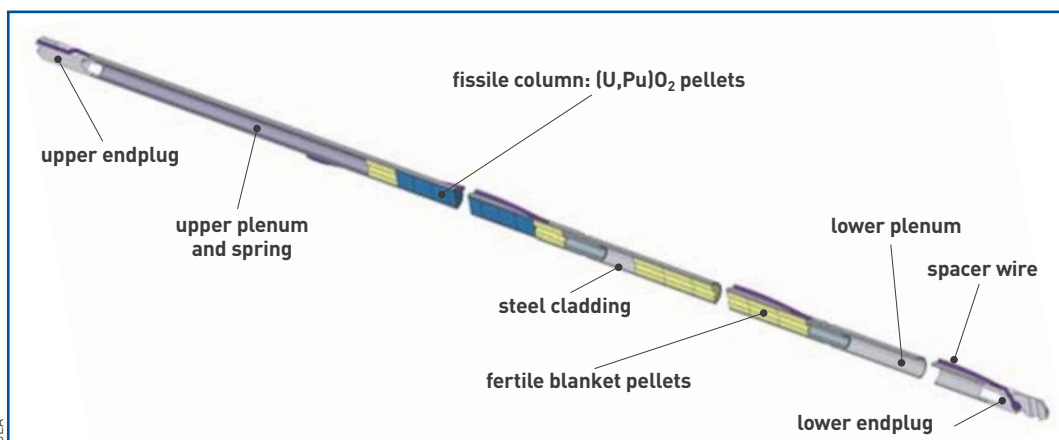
Exploded view of an SFR fuel pin, showing its main components.
